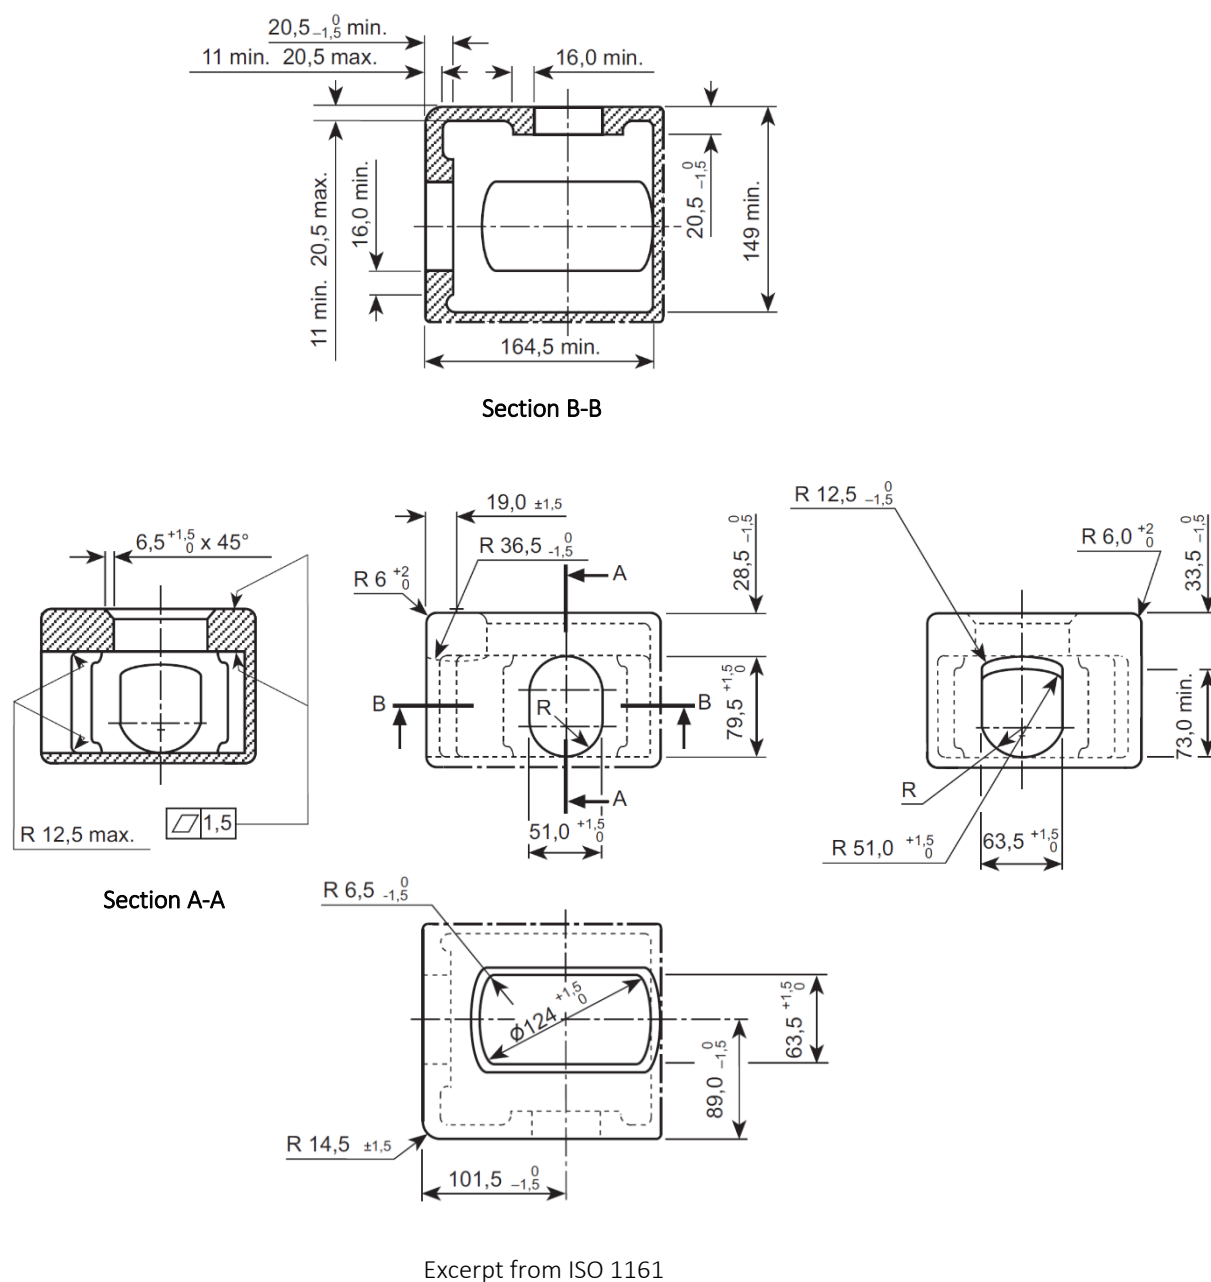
Standard Corner Fittings – Top Corner Fitting
